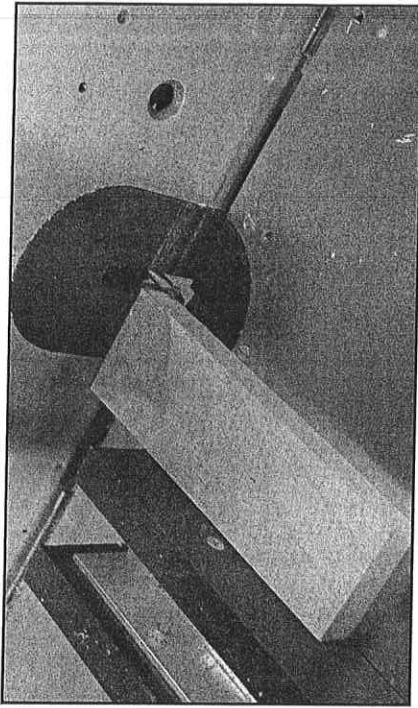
Make socket cut moving workpiece from left-to-right stopping cut when mark reaches fence.
